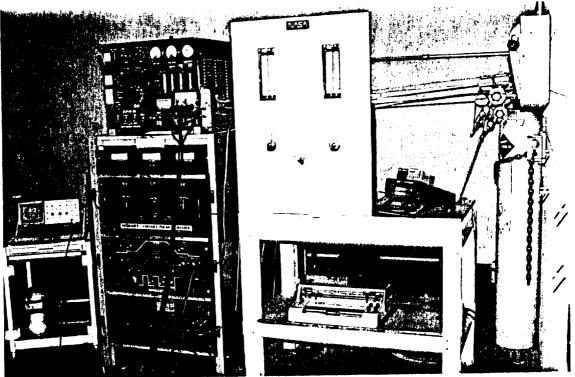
Photographs showing weld frame assembly, UTEP controler, and Hobart Welder.
